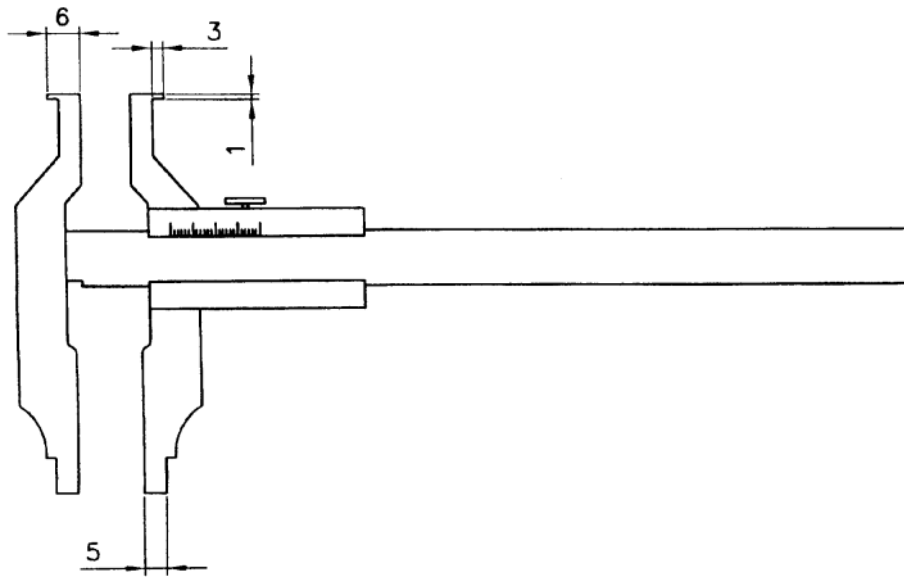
VERNIER CALLIPER FOR MEASURING RIM WIDTH
